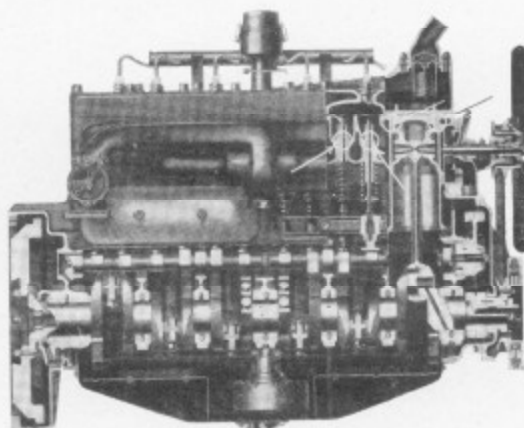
Automobile Motor with Sections Cut Away to Show Construction
